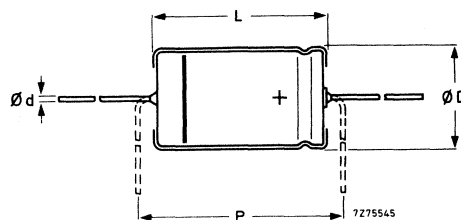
See Table 3 for dimensions ϕd , ϕD , L and P.
